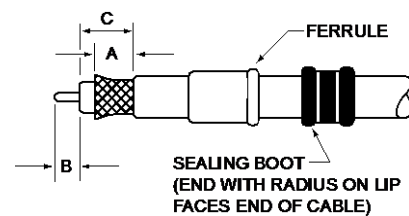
Installation of Sealing Boot and Ferrule on Coaxial Cable Before Crimping Contacts
